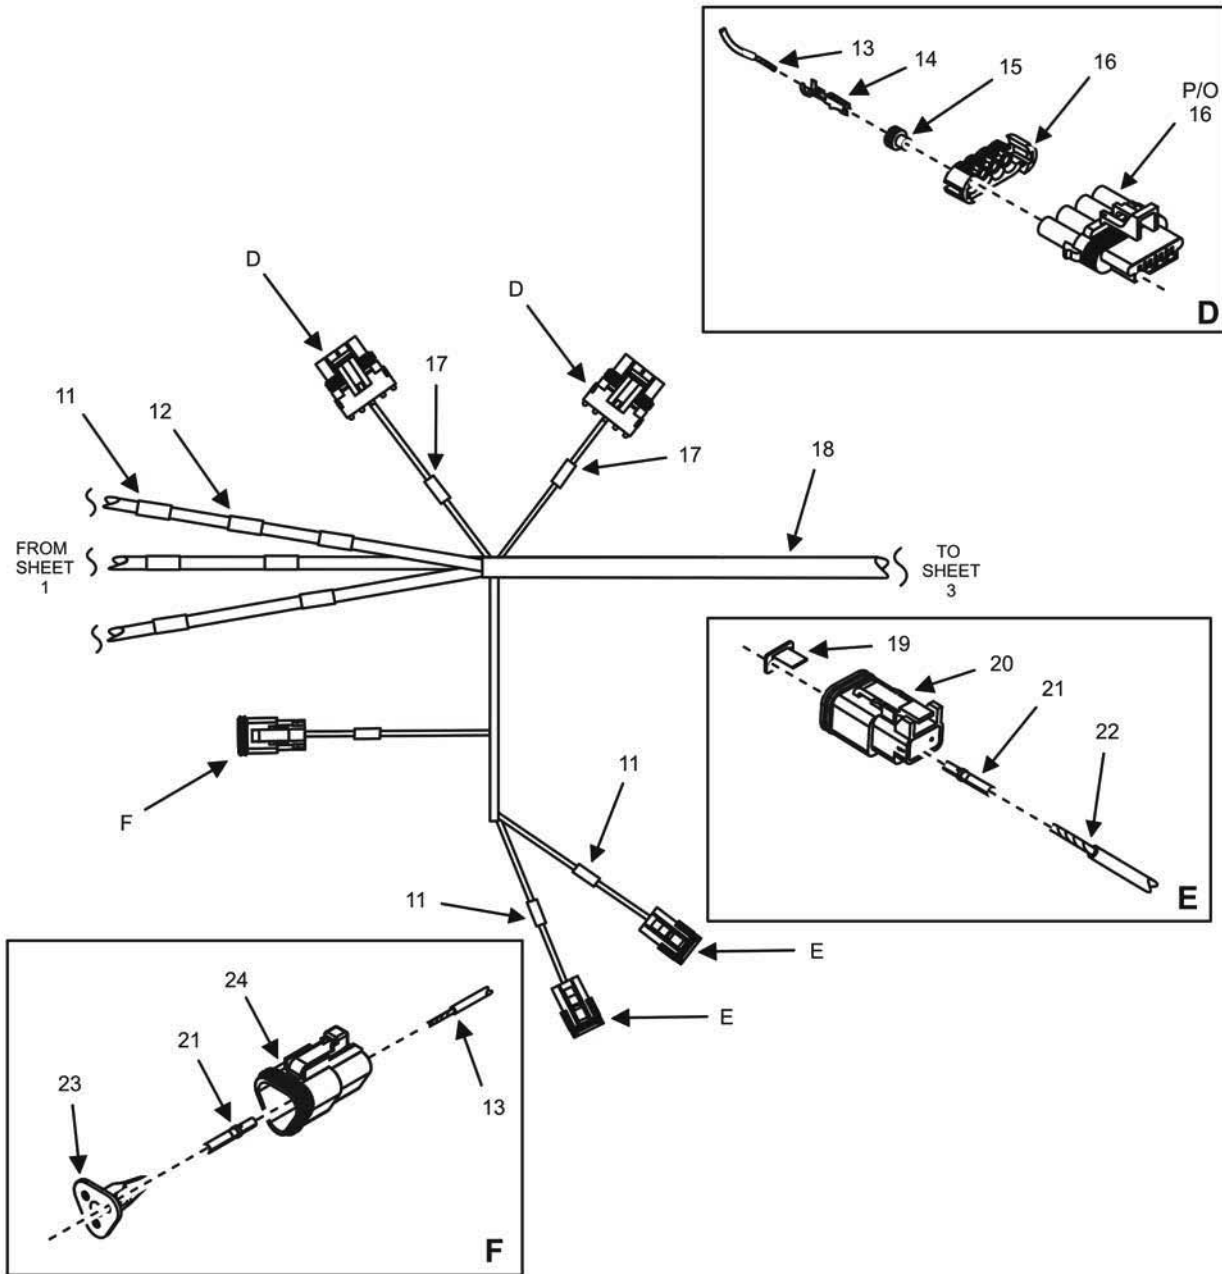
Engine Wiring Harness (Sheet 2 of 14).
